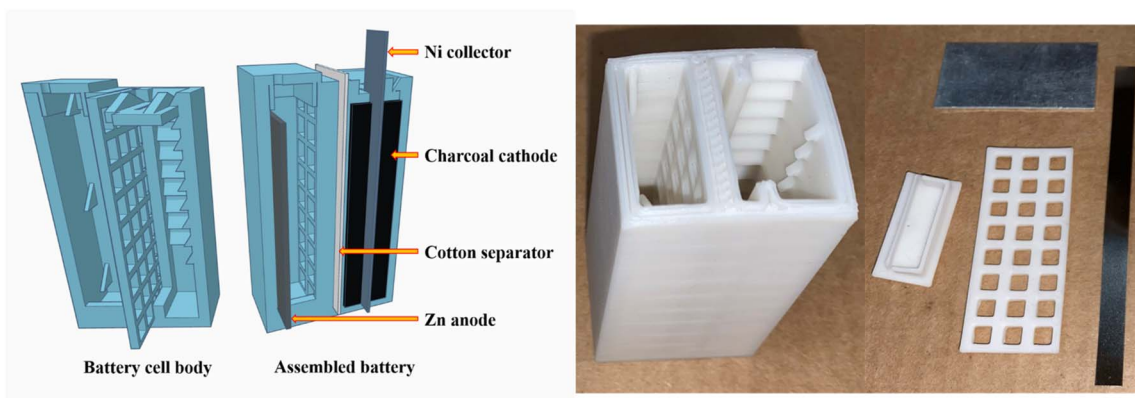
The exploded-drawing and photographs of the 3D-printed prototype cell.
